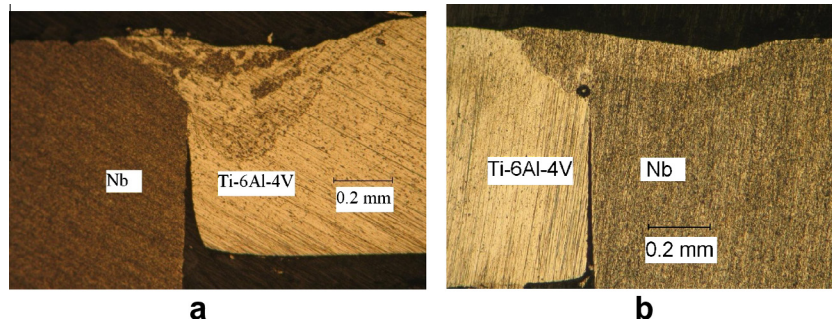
Cross section of the dissimilar welds between Ti-6Al-4V and Nb sheets with different laser beam alignment. (a) TN3 weld with 50% of the beam positioned on niobium and 50% on Ti alloy and (b) TN4 weld with 70% of the beam positioned on the Nb side.
